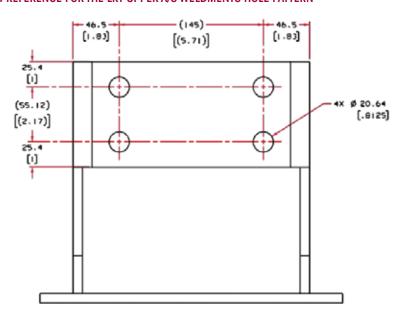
REFERENCE FOR THE LKT UPPER A/S WELDMENTS HOLE PATTERN
